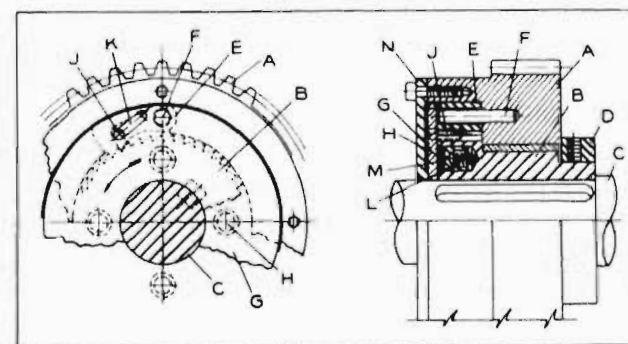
Ratchet mechanism on an over-run assembly which operates silently and with minimum wear on the parts.
